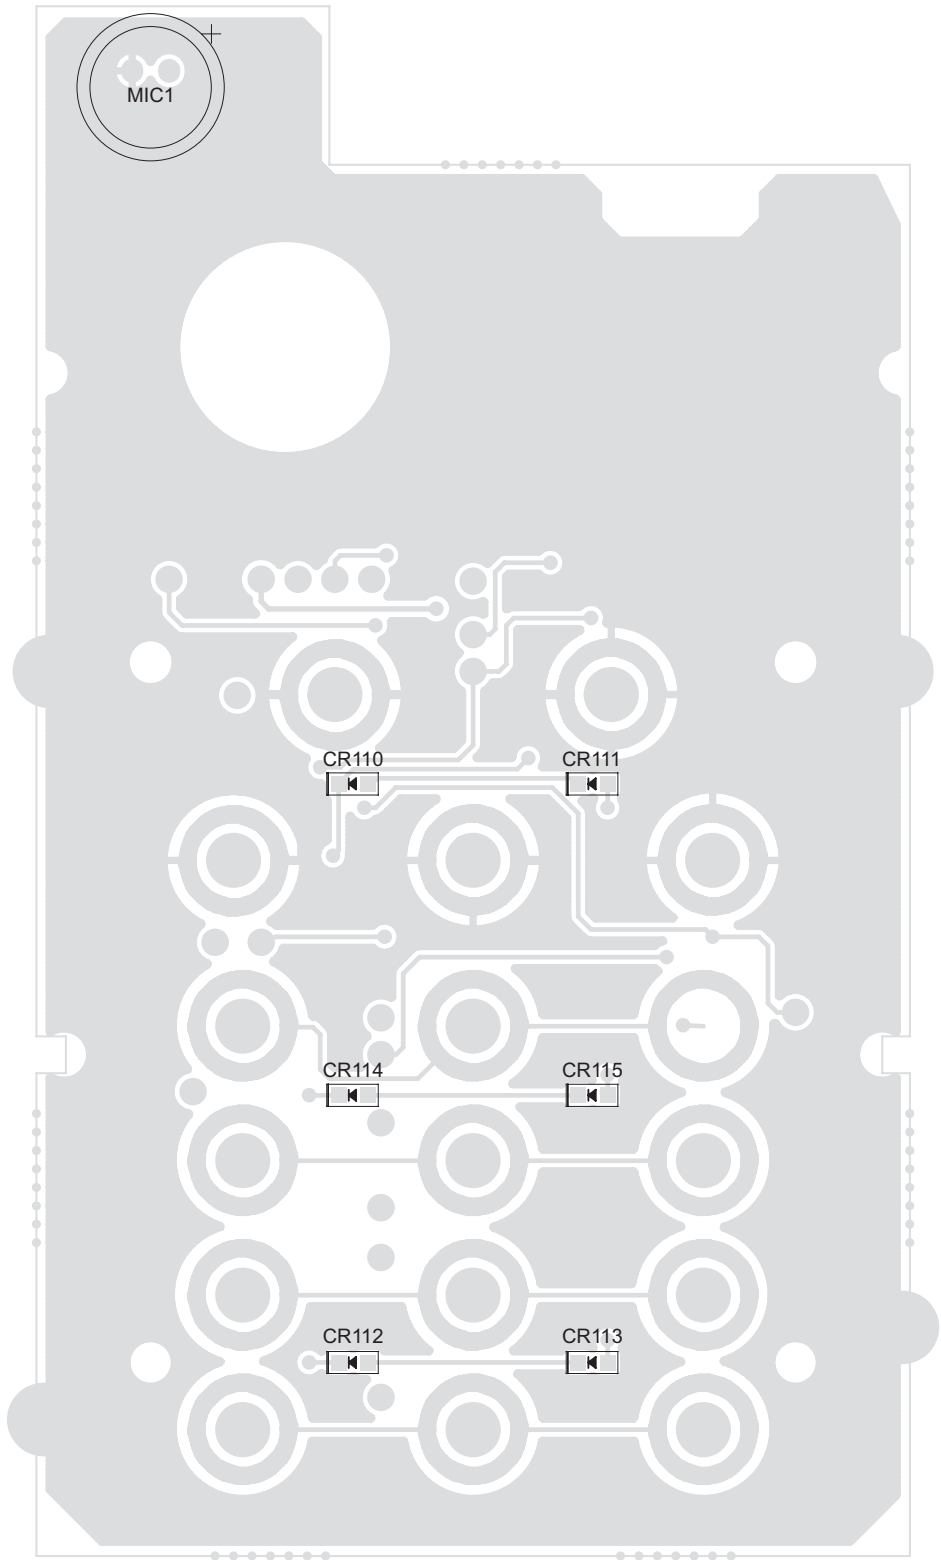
VHF (136–174 MHz) Keypad Board: PCB No. E11-000886-00
